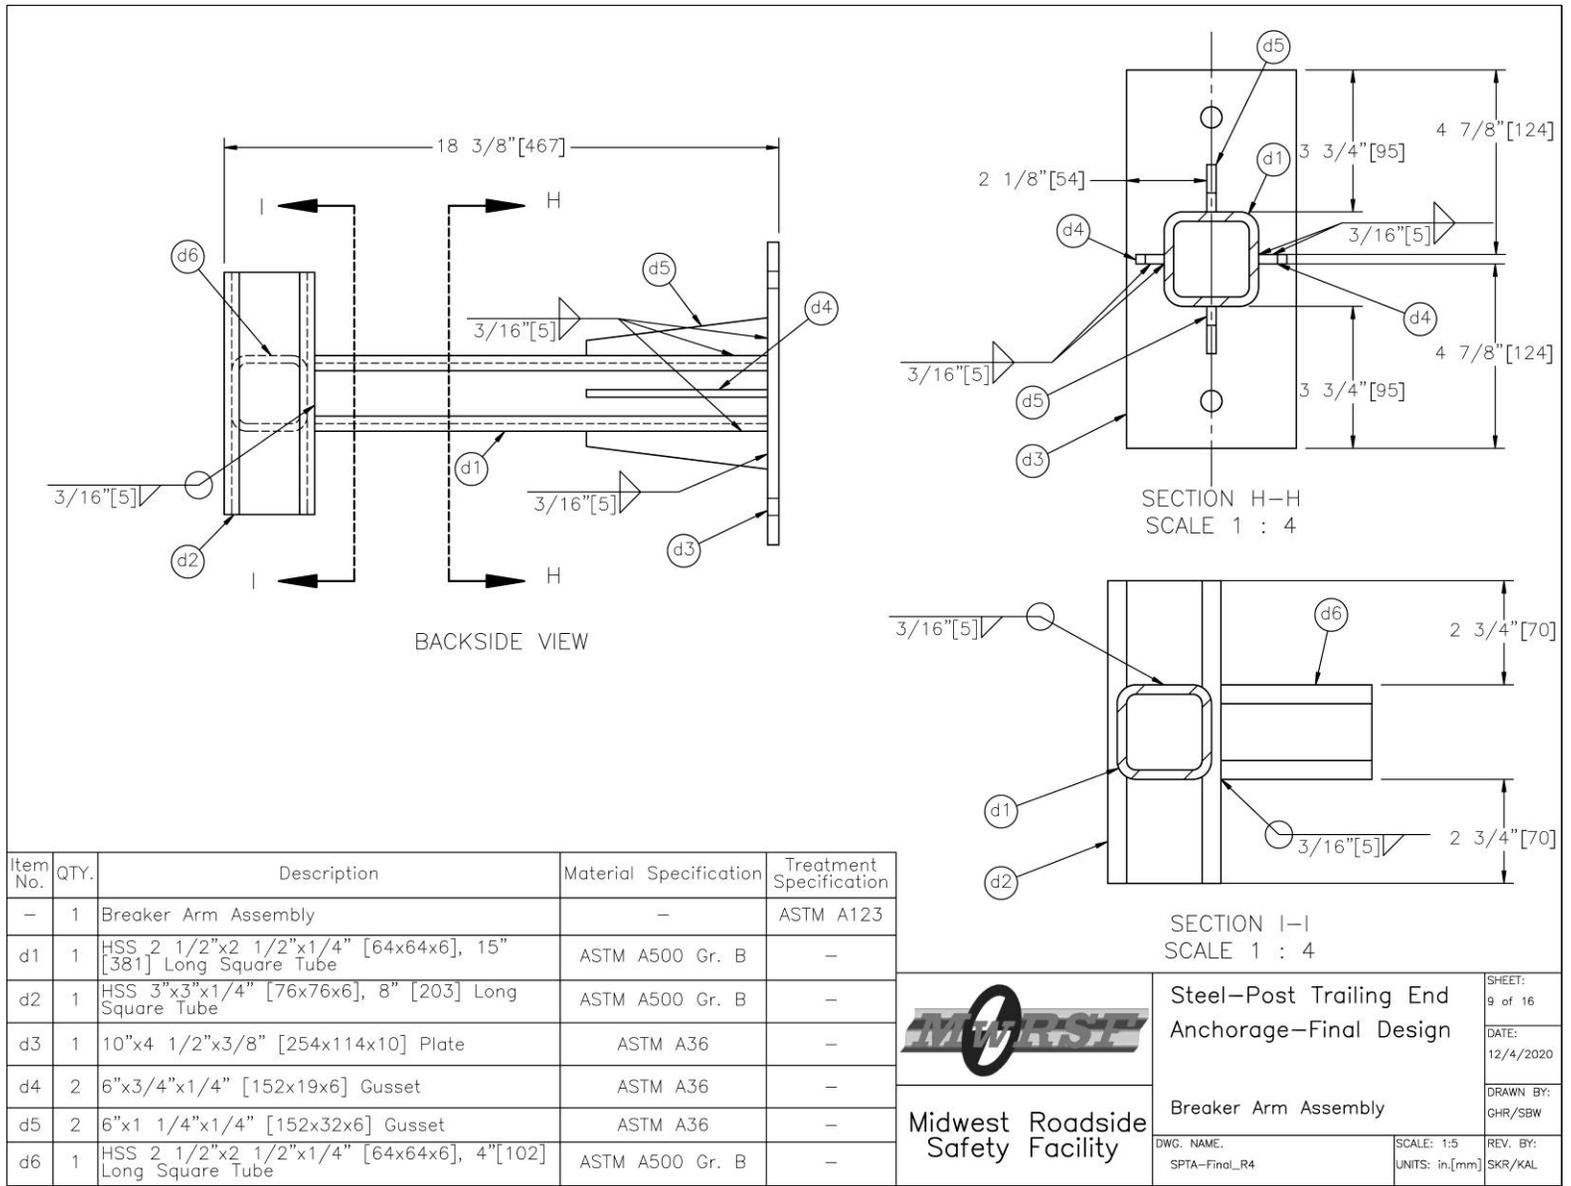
Steel-Post Trailing End Anchorage, Breaker Arm Assembly
